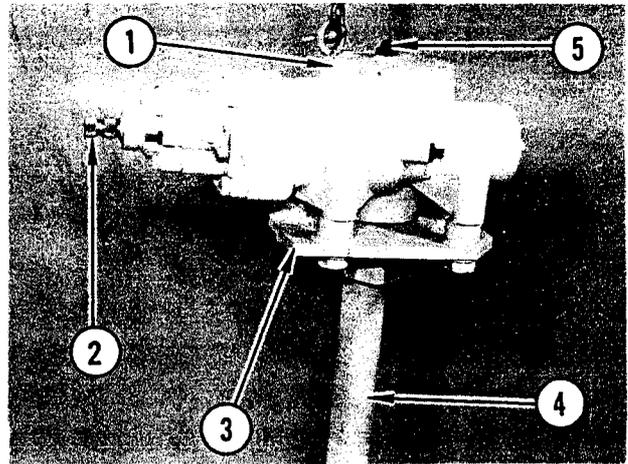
REMOVE STEERING GEAR ASSEMBLY
